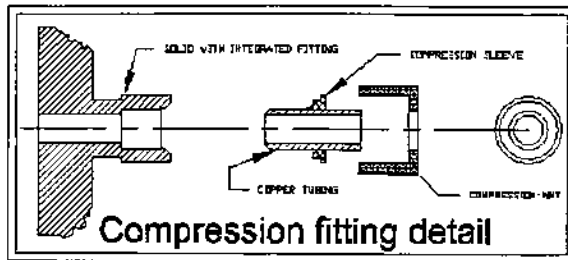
, Detail excerpted from appendix drawing Test section layout.
